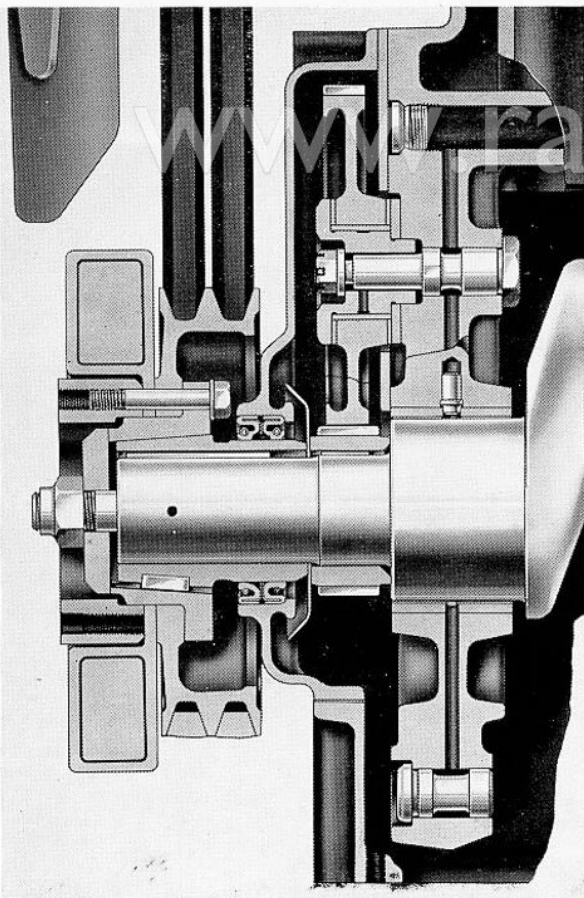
SECTION THROUGH FRONT OF VERTICAL ENGINE SHOWING CRANKSHAFT AND IDLER GEAR
